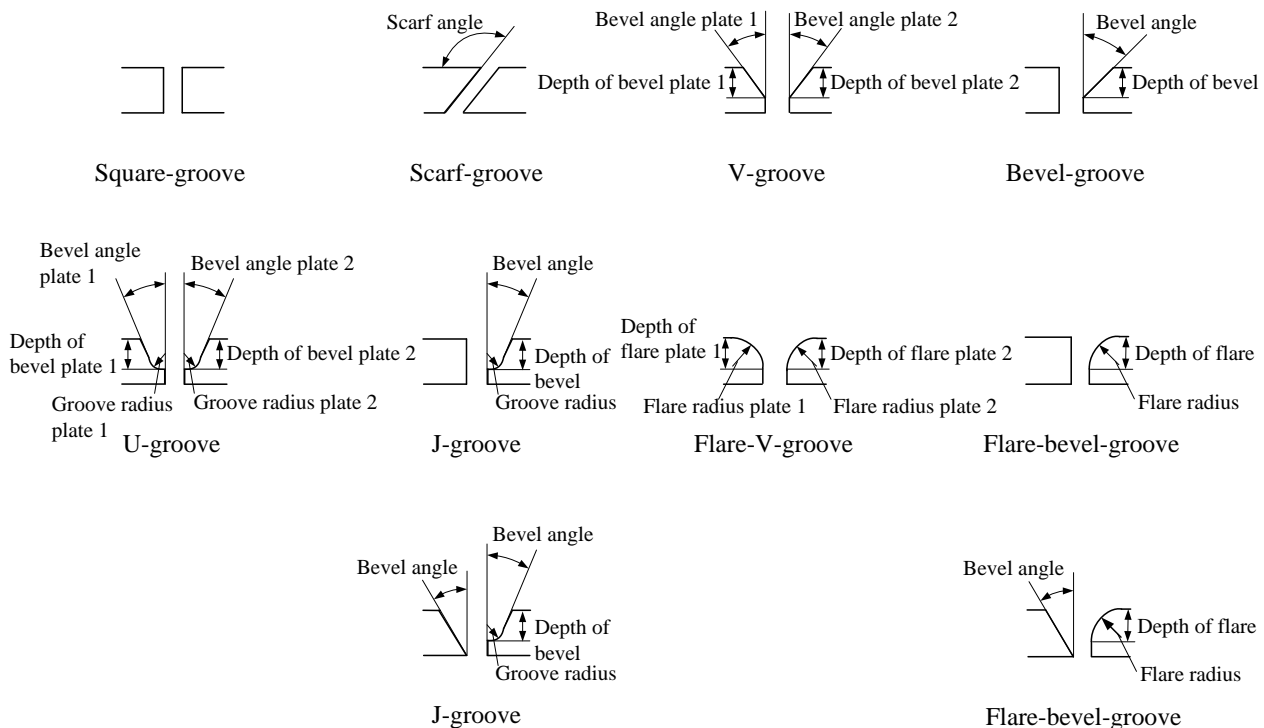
Workpiece geometry for weld grooves.
